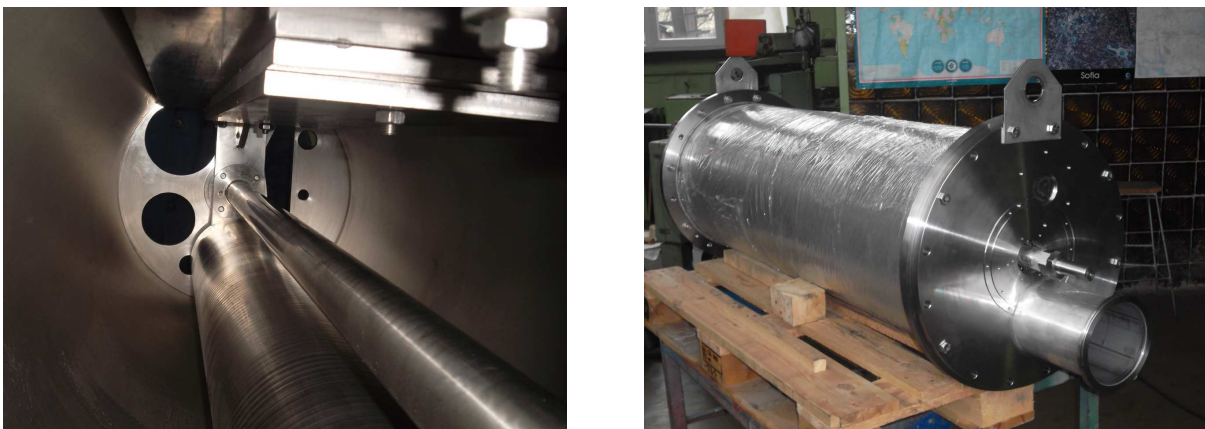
New beam stopper inside (left) and outside (right) view.
